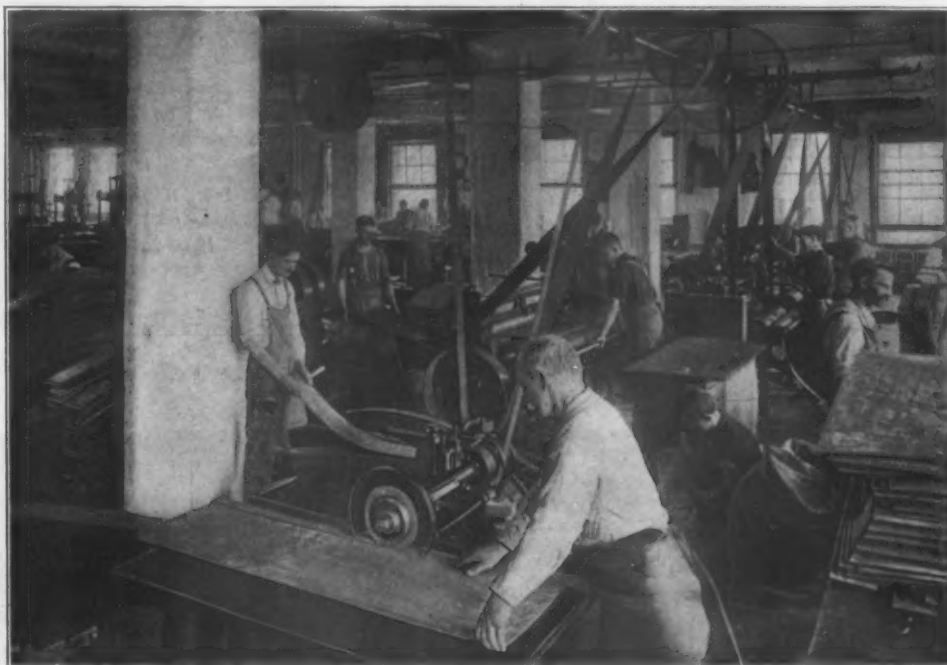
A View on the Sixth Floor, Showing the Cutting and Searing Machines.
